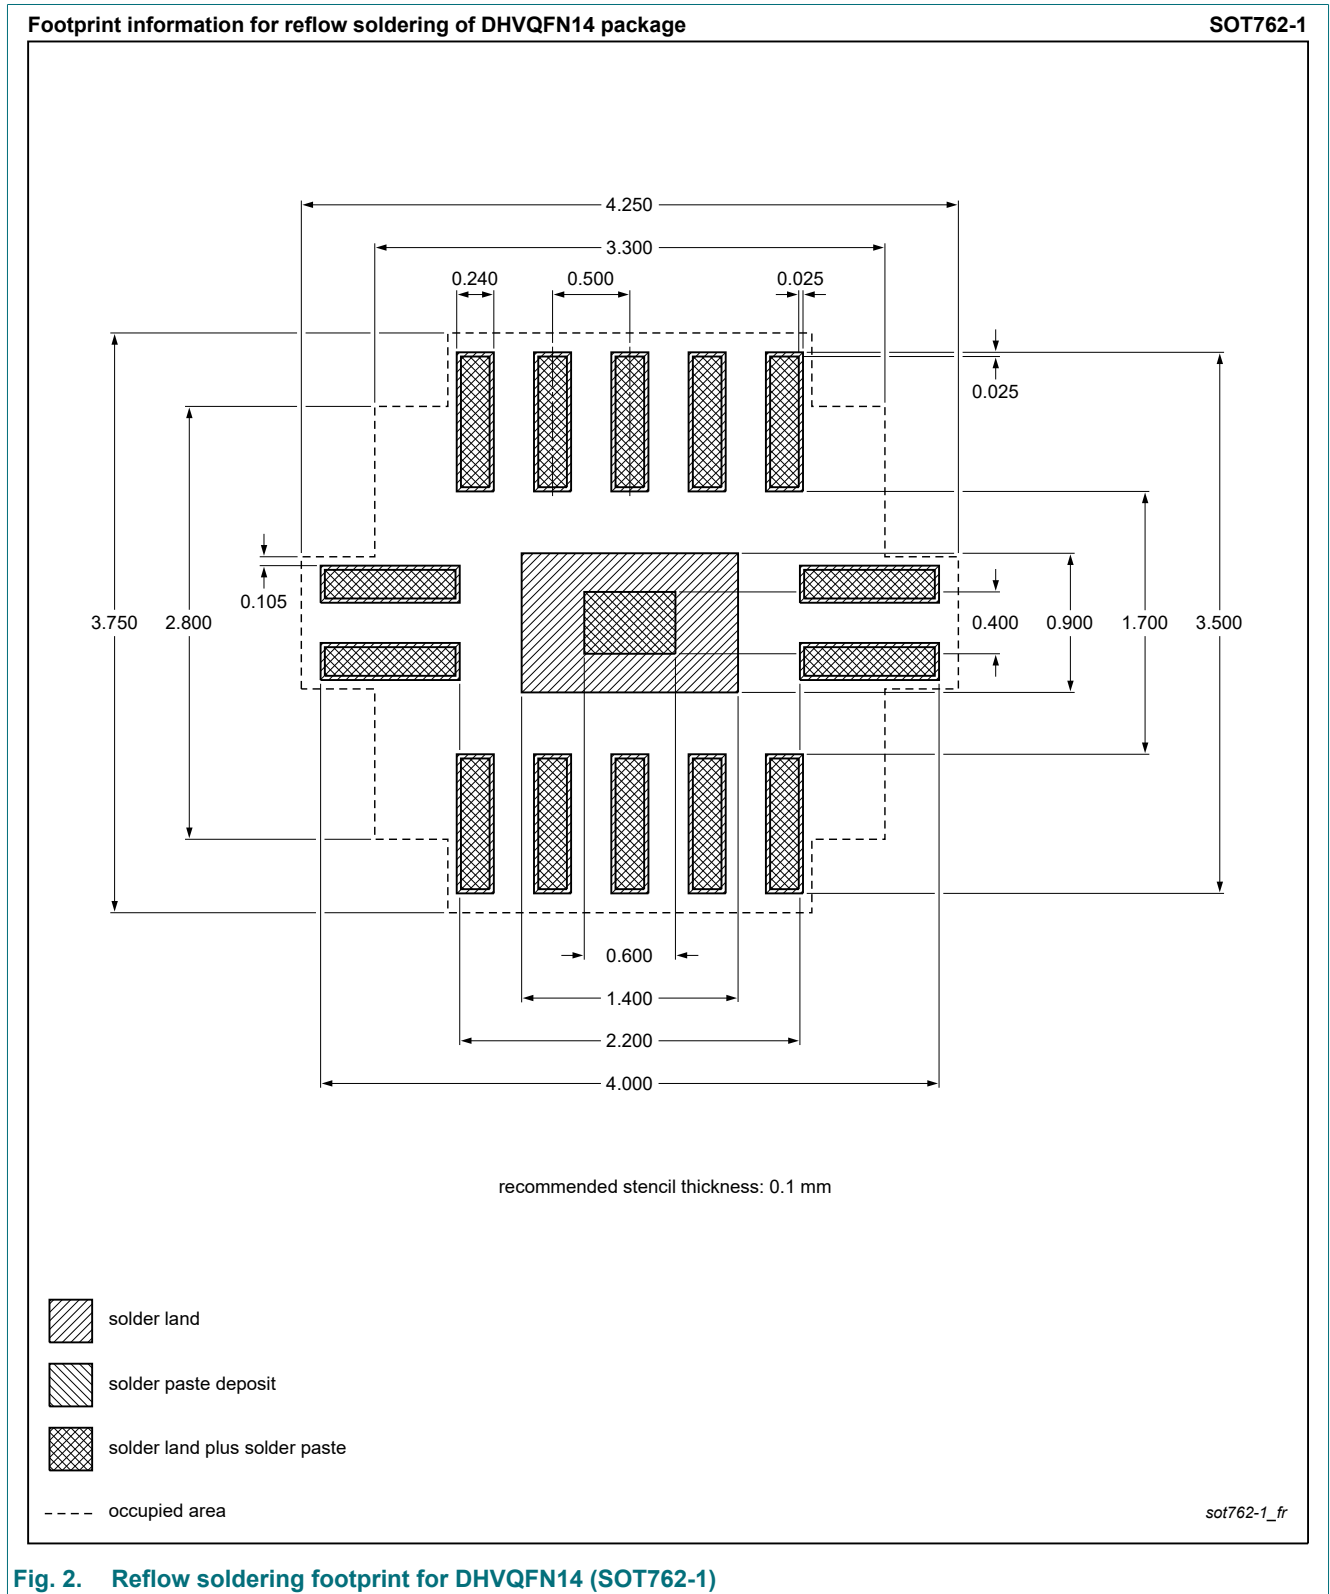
Reflow soldering footprint for DHVQFN14 (SOT762-1)
